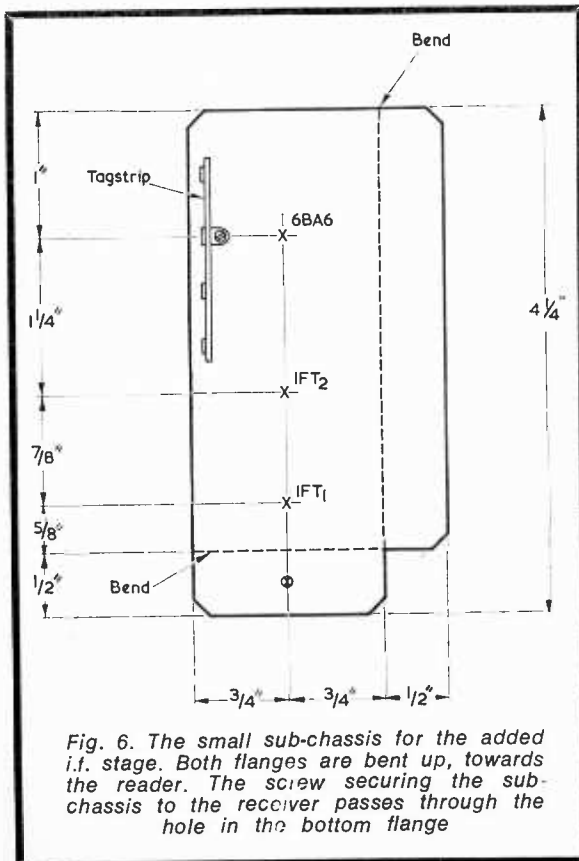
The small sub-chassis for the added i.f. stage. Both flanges are bent up, towards the reader. The screw securing the sub-chassis to the receiver passes through the hole in the bottom flange
